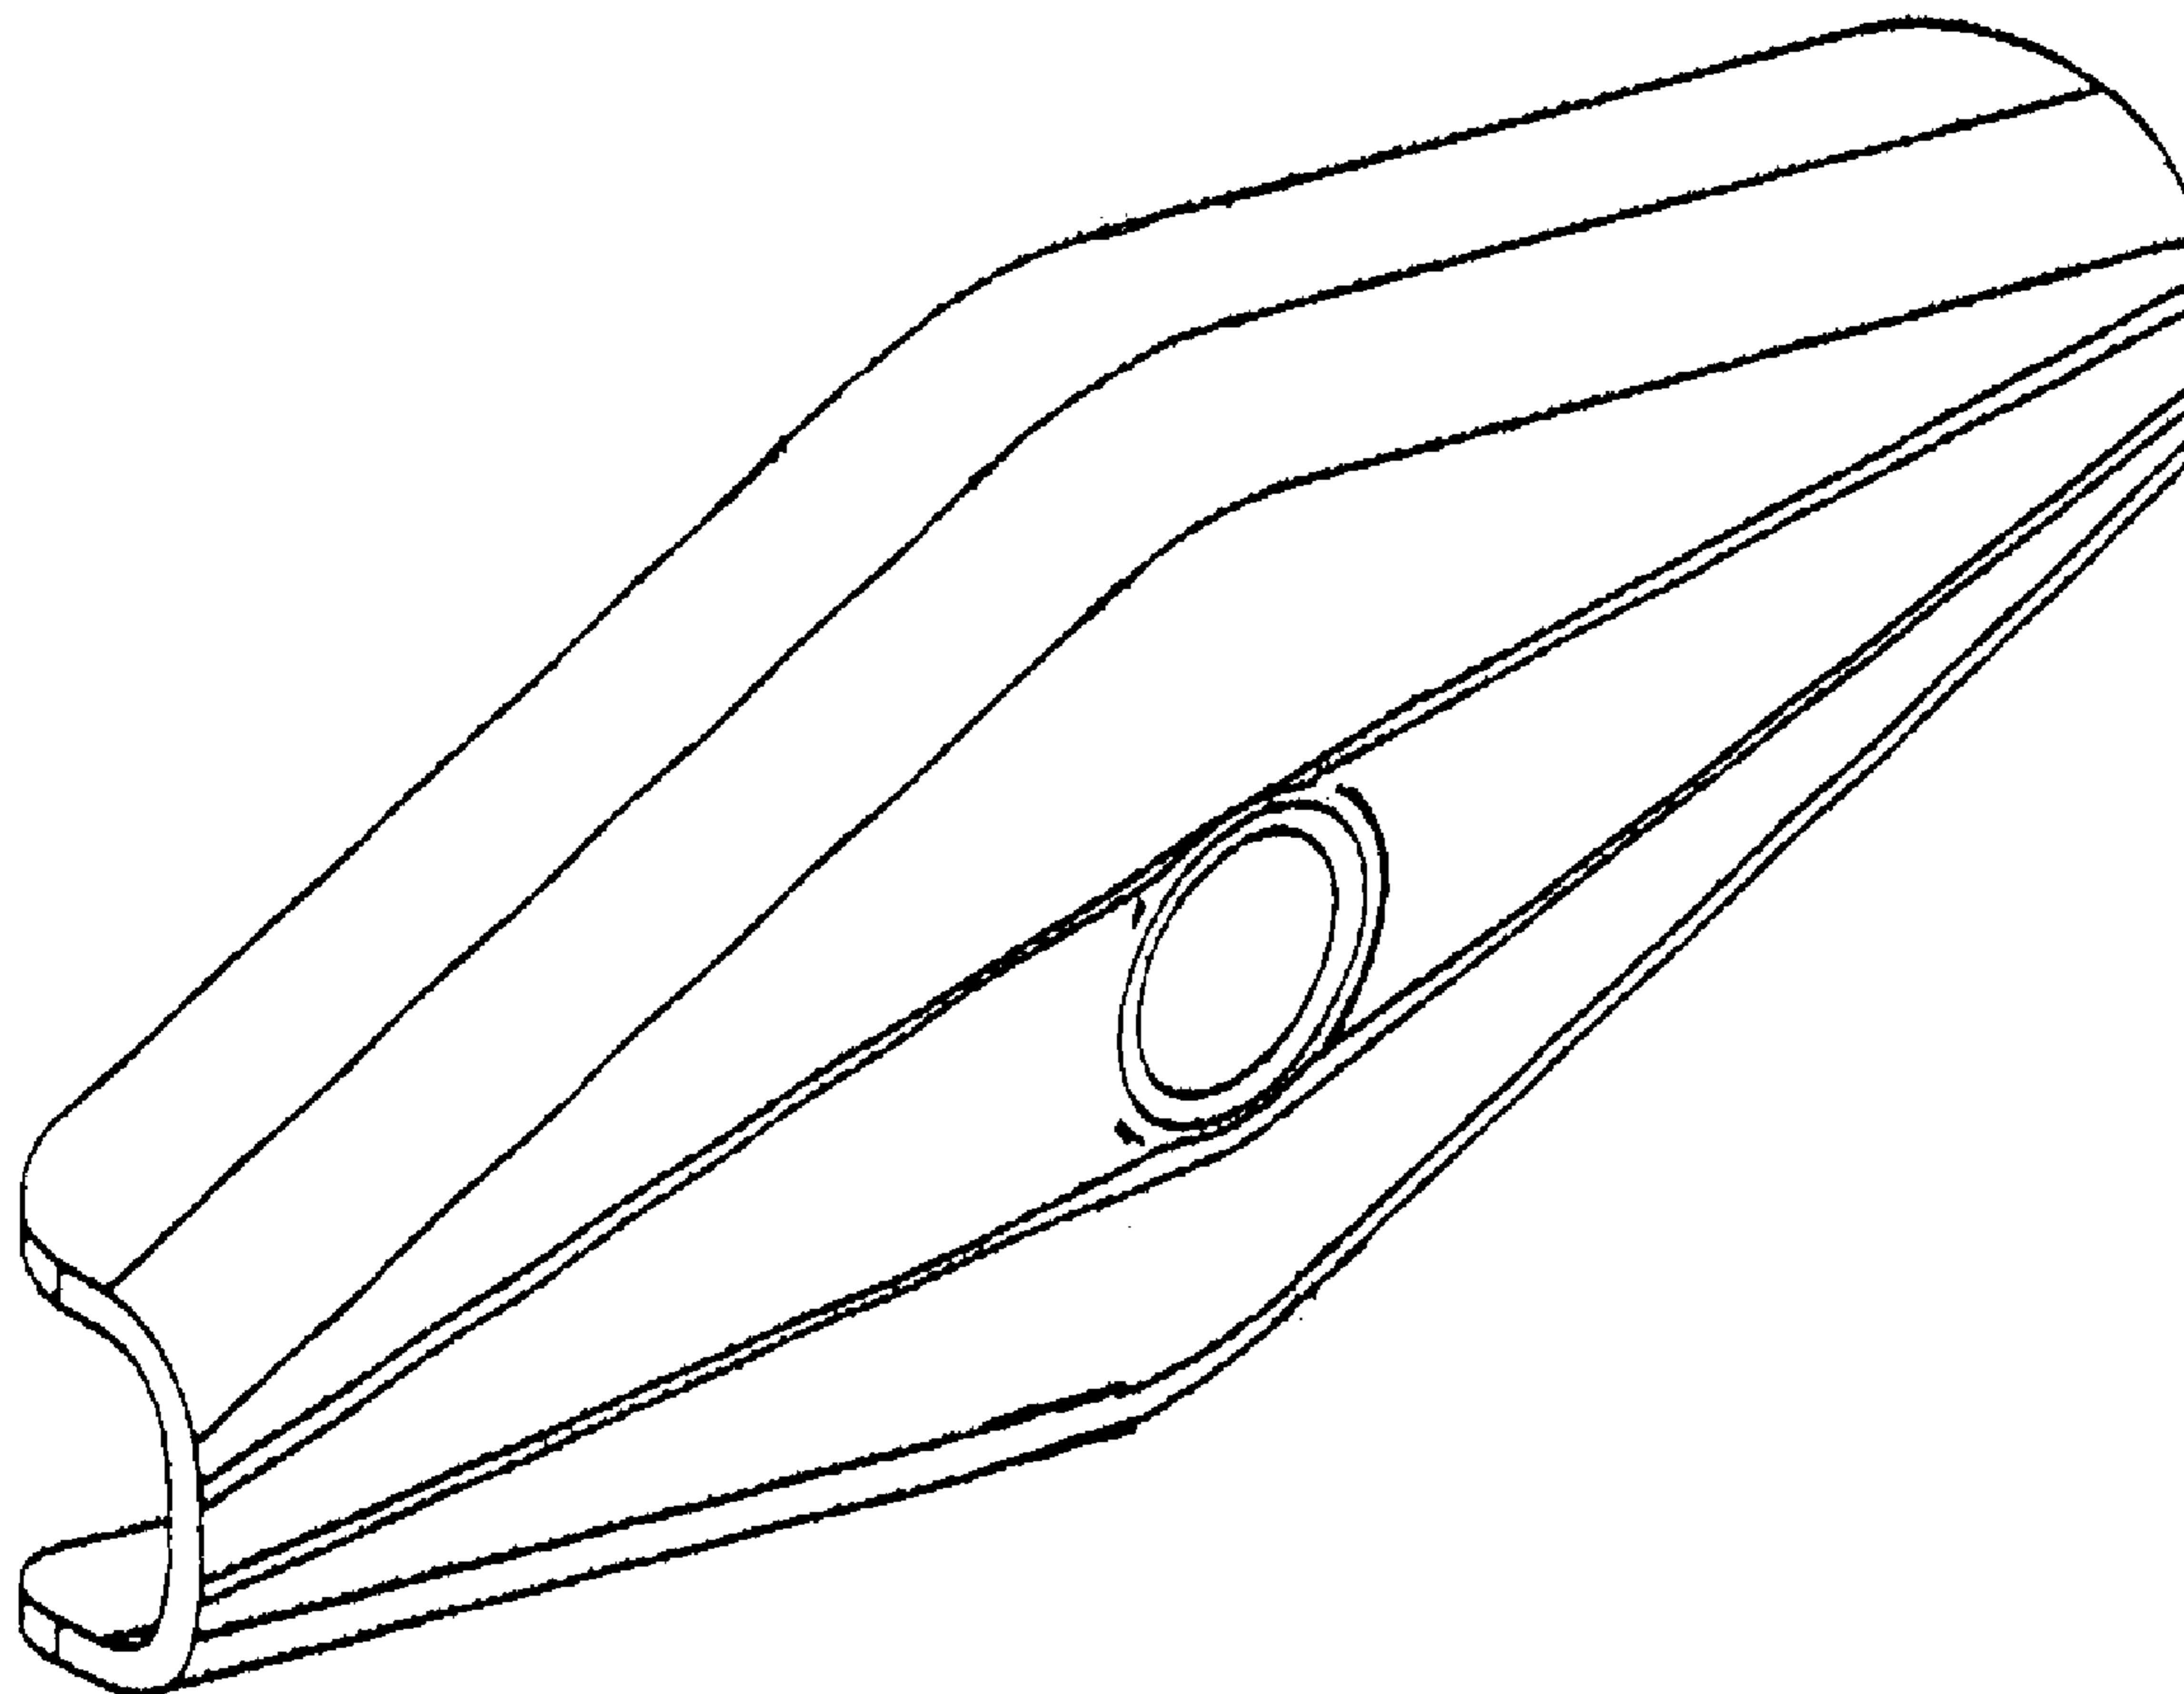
is a front, left side perspective view of the wheel hub cover for rotary air coupling, showing our new design;
